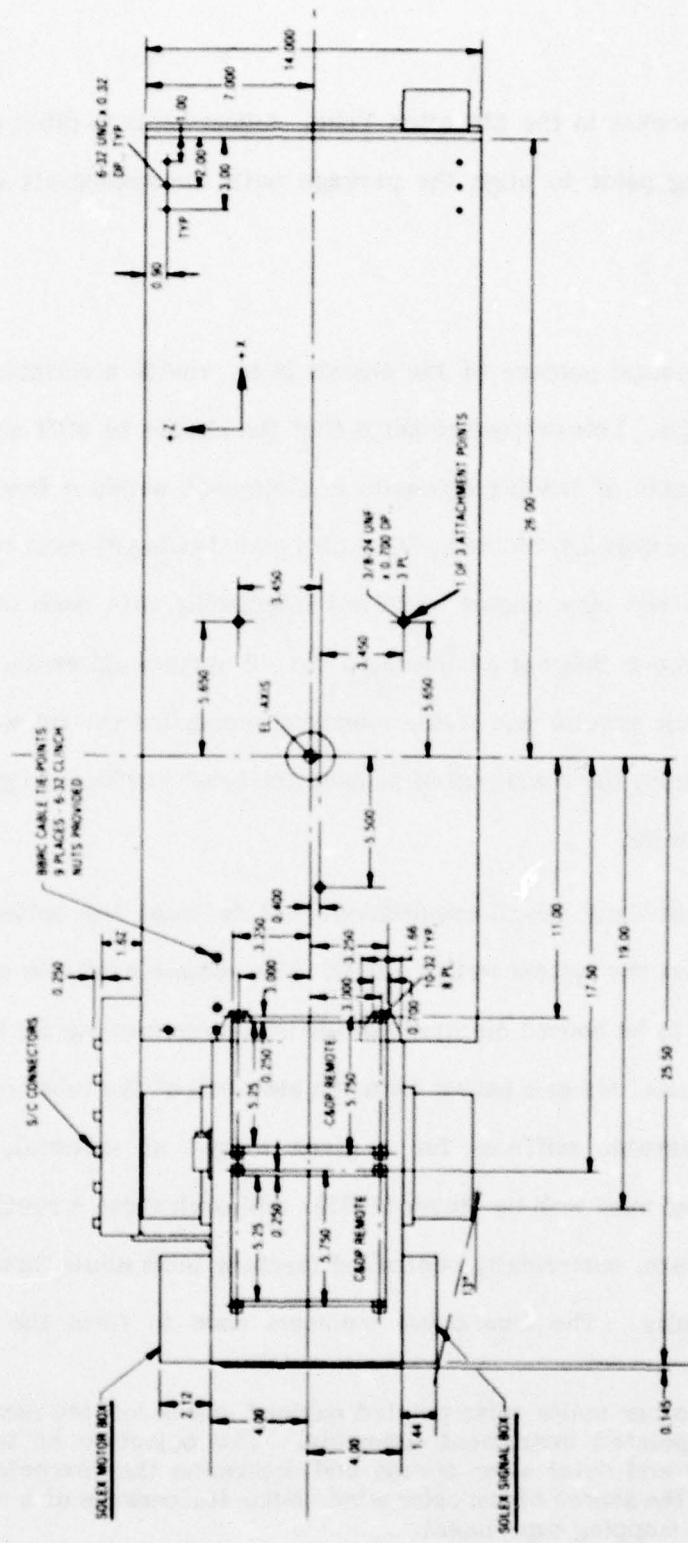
CRLS-229 Outline and Mounting Drawing, Part 3 of 3.
